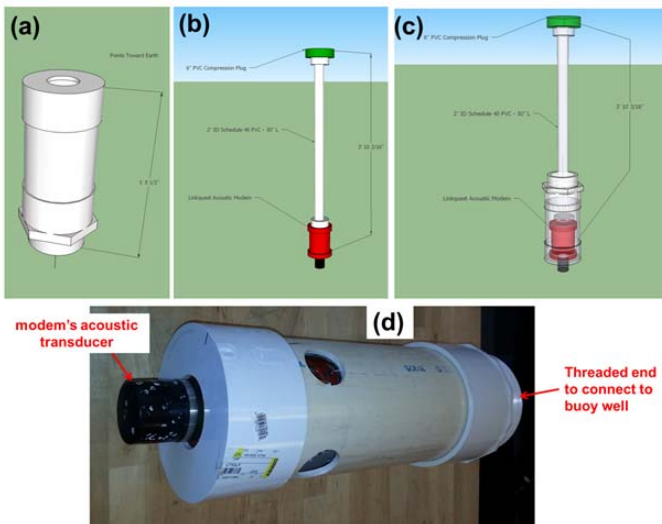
Surface acoustic modem mount (a) threaded 6" PVC well extension (b) acoustic modem mounted to PVC pipe with flange, (c) modem and mount inserted into well extension, (d) photo of acoustic modem inserted into well extension (prior to attaching to the buoy).
